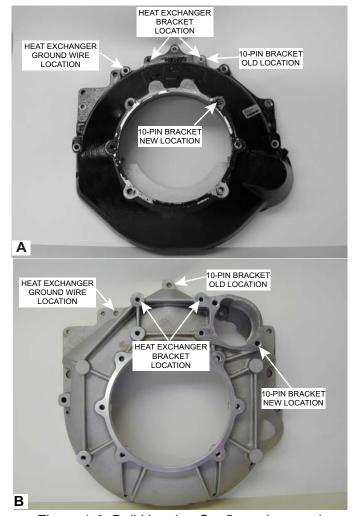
Bell Housing Configurations and Accessory Mounting Locations
